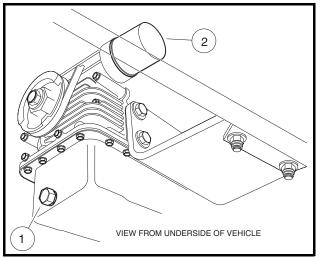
10 Engine Oil Drain Plug and Oil Filter – Diesel Vehicles
